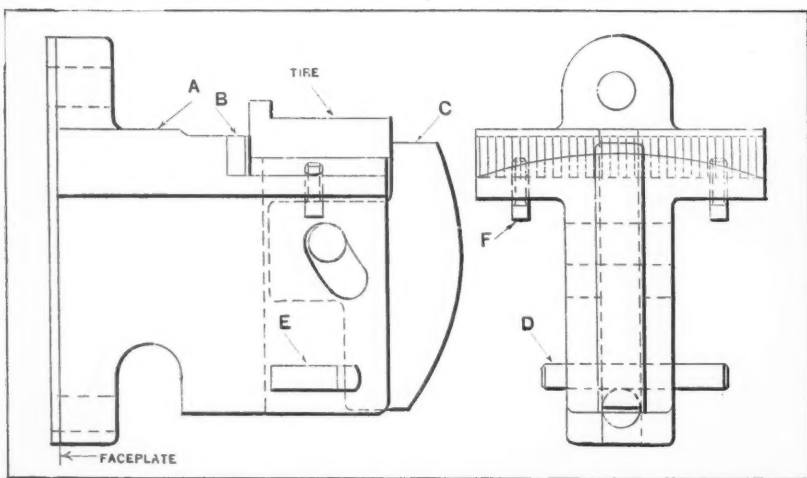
Diagrammatic Views Illustrating Method of Holding Work in Fixture Shown in Fig. 1
